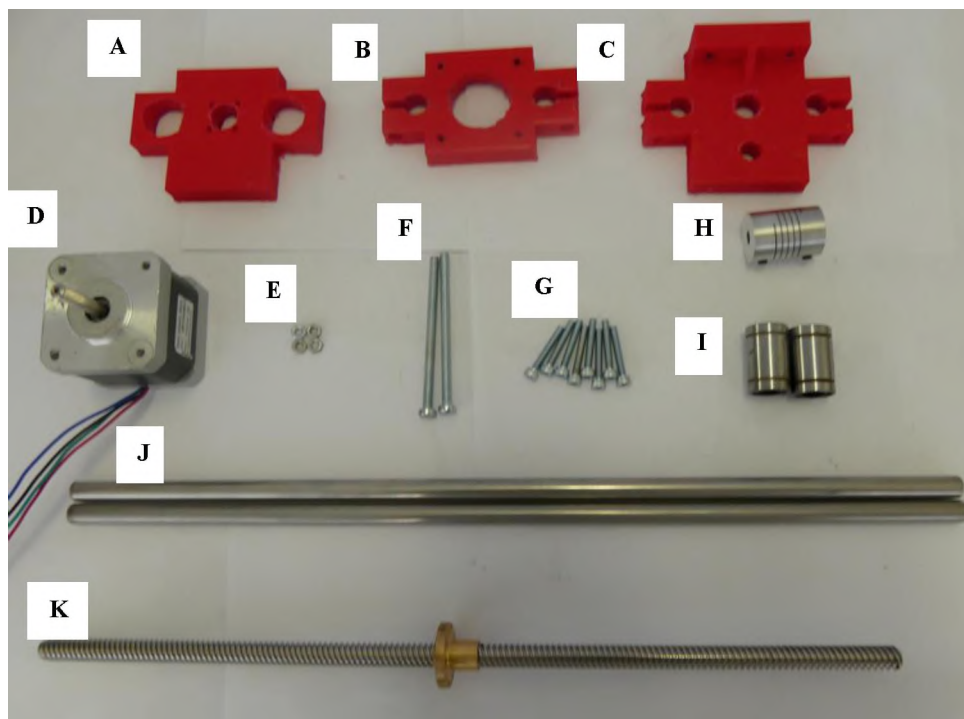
Required components for screw-driven extruder assembly. A: Printed pneumatic drive piece. B: Printed NEMA 17 stepper motor mount. C: Printed syringe holder. D) NEMA 17 stepper motor (with extended wires). E: 4 x M3 nuts. F: 2 x M3 x 500 mm screws. G: 8 x M3 x 20 mm screws. H: 8 mm aluminium stepper motor shaft coupler (with 4 x grub screws). I: 2 x LM8UU linear bearings. J: 2 x M8 x 300 mm smooth rod. K: 8 mm lead screw with nut.
